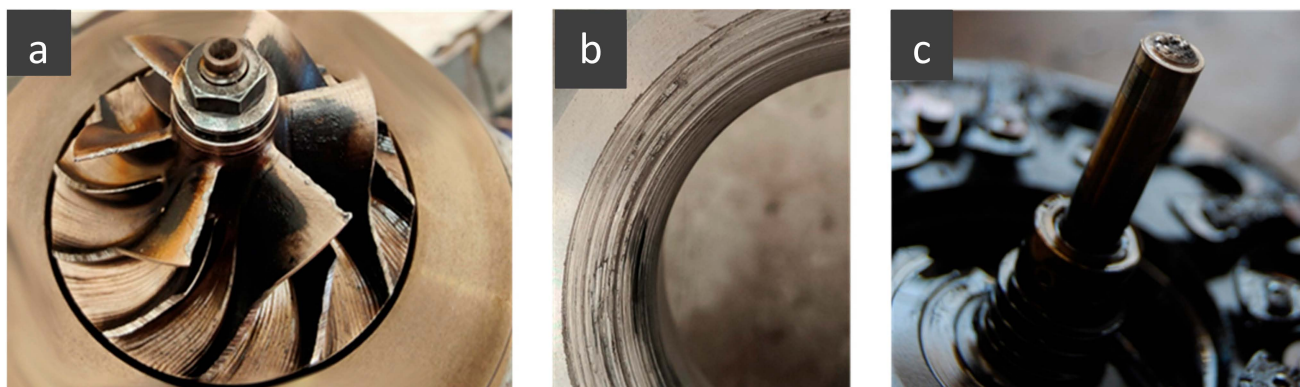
Details of a damaged turbocharger assembly. The pictures show the effects of damage to the bush: (a) interference effects on the compressor blades; (b) signs of blade contact with the case; (c) shaft broken due to torsion.
